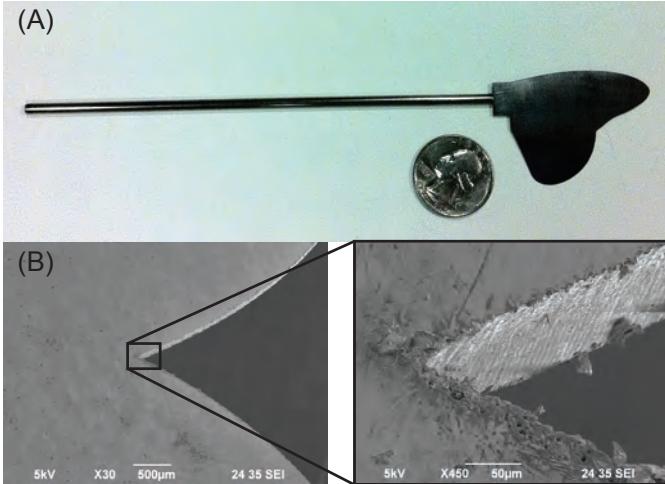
The wing model is machined using a DPSS laser in order to ensure a very clean and repeatable cut of the wings.
